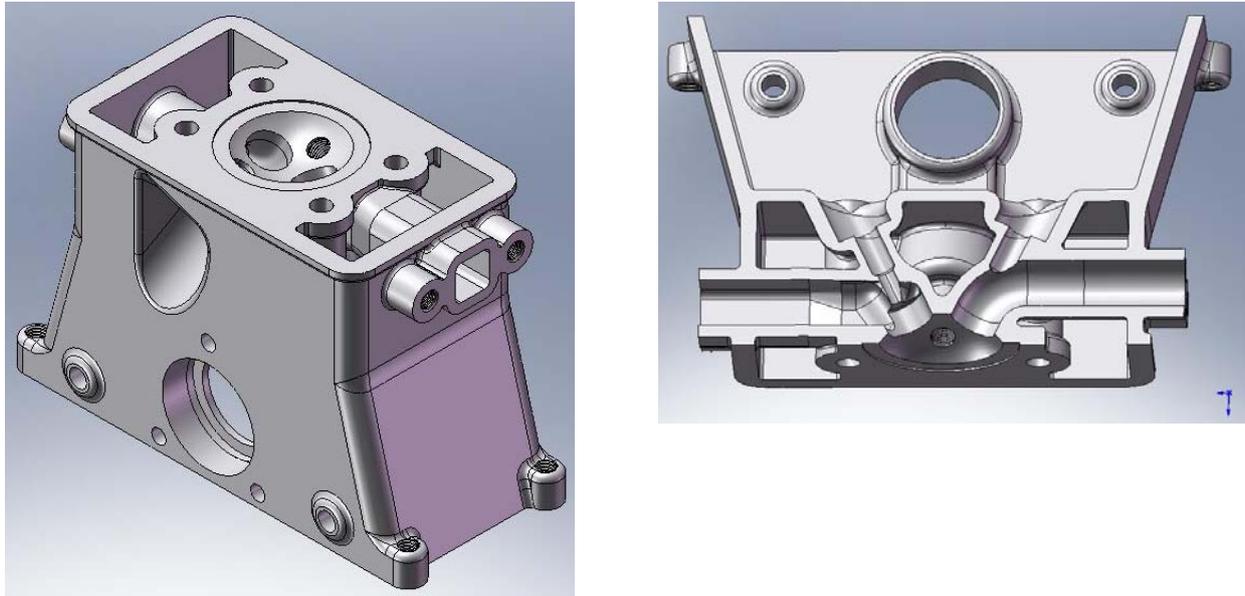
Design #3 – Bottom isometric view (left) and half cut showing the new coolant chamber (right)
